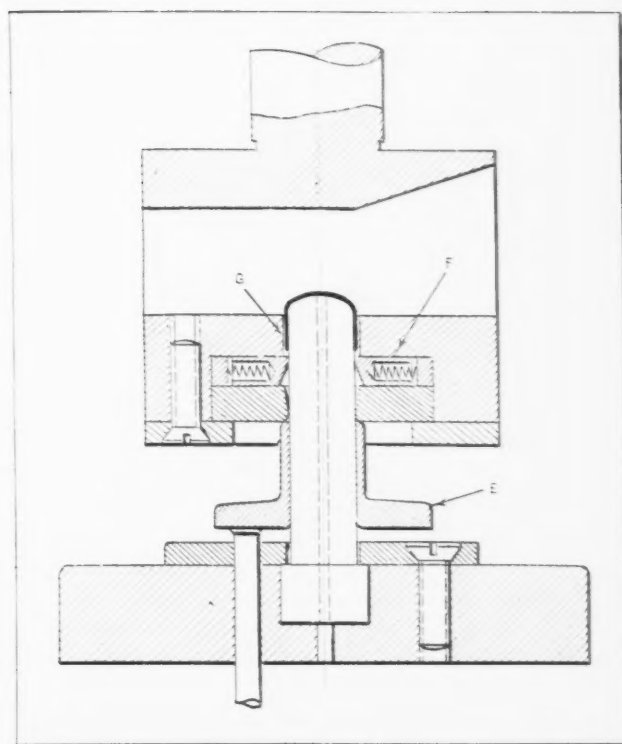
Die for Drawing Work to Shape C, Fig. 2
